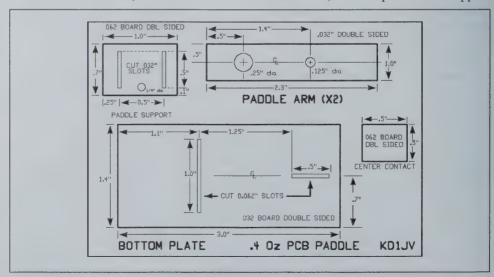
Dimensions for the parts of the KD1JV PCB paddle.
